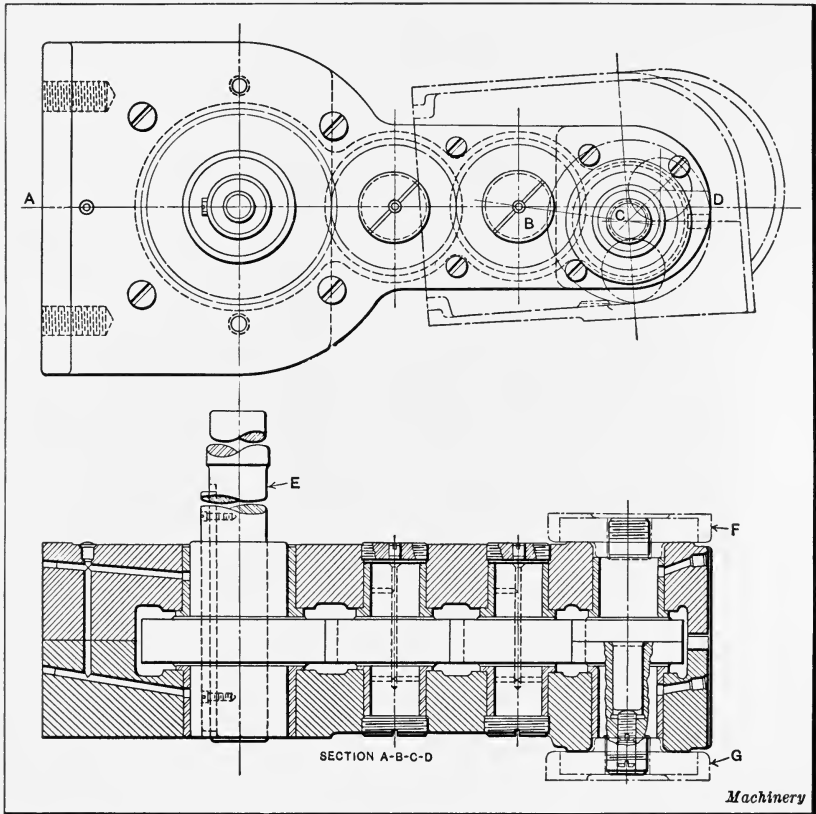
Auxiliary Cutting Head used in milling Surfaces on Inside of Case
